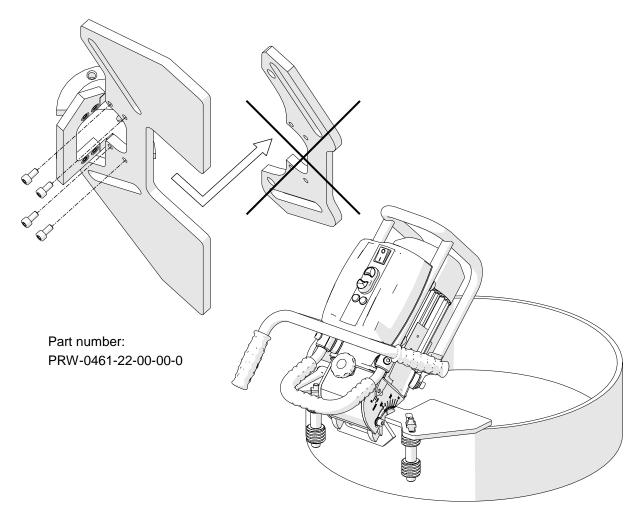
Machine prepared for work on larges pipes (Ø260–600 mm, 10–24")
